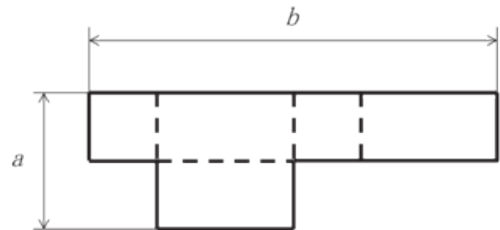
Definition of dimensions for unfolded pattern of sheet metal parts.
